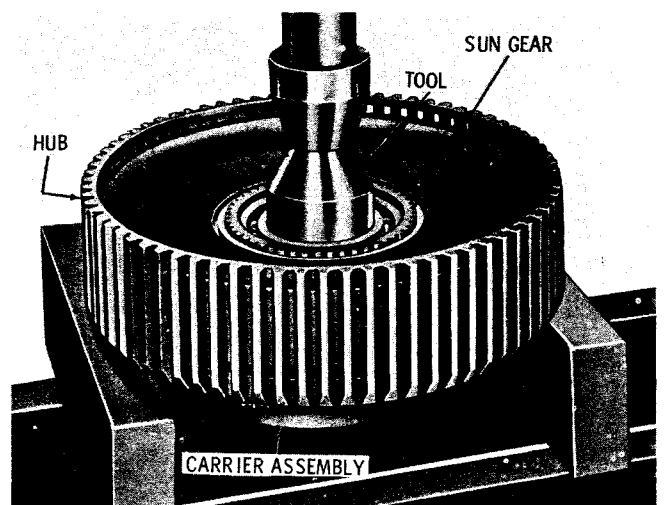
Pressing splitter carrier assembly from splitter sun gear bearings
